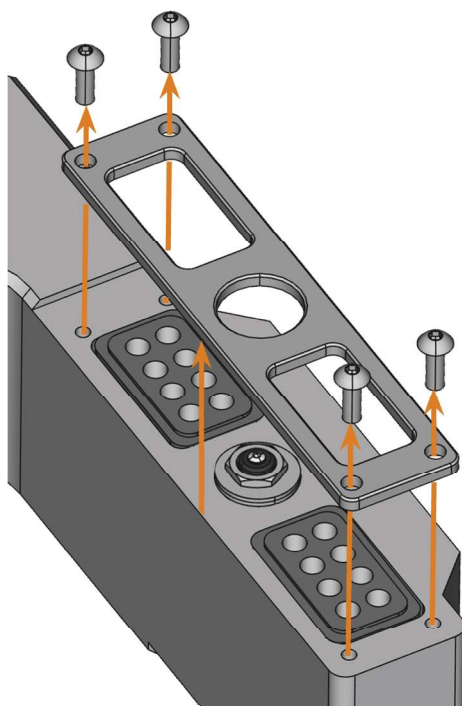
UNSCREWING THE SCREWS AND LIFTING THE COVER
